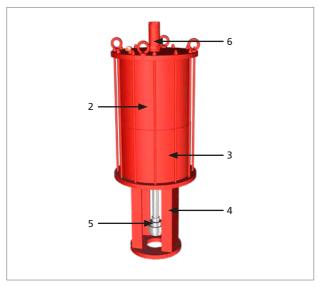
LP/S type 1/ type 2 with stop bolt main components
